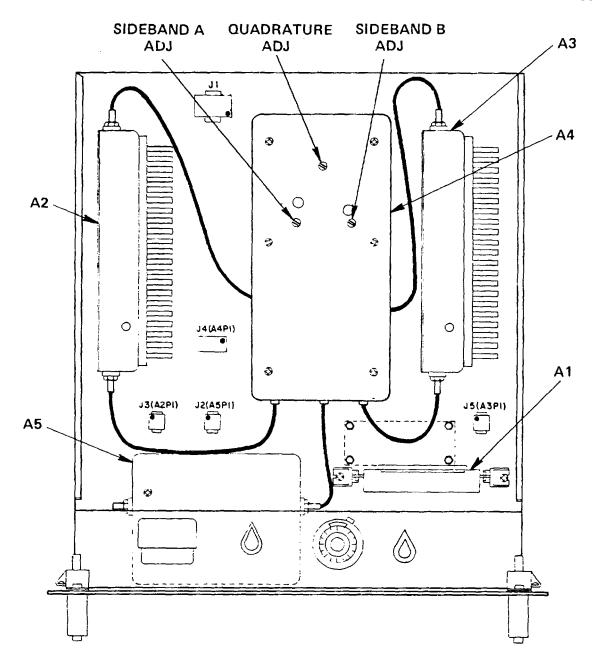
Sideband Transmitter Front Panel and Chassis-Mounted Parts Location Diagram (Sheet 1 of 3)
